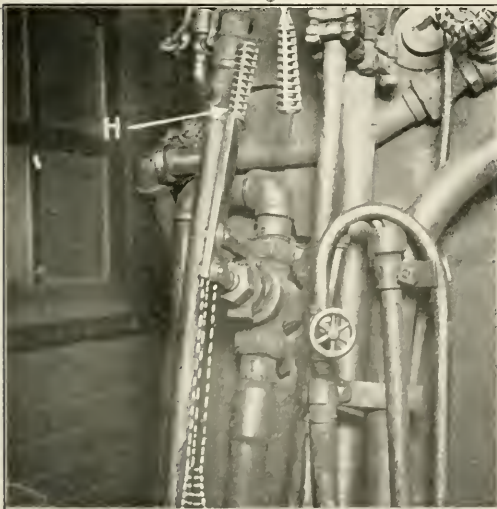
Brigham Ash Pan Valve Applied to Boiler Head
